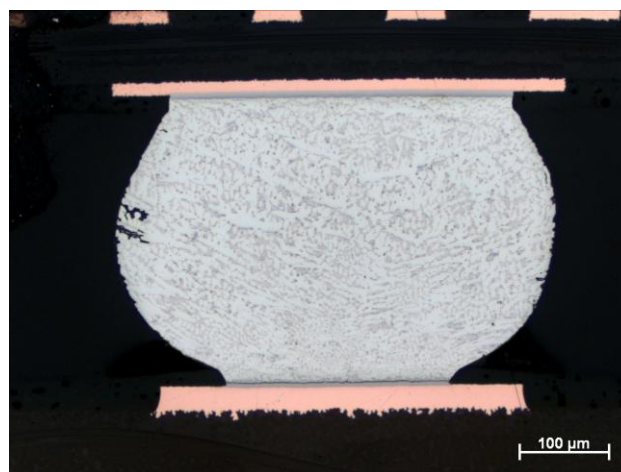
BGA Package Cracks at PWB /Ball interface
